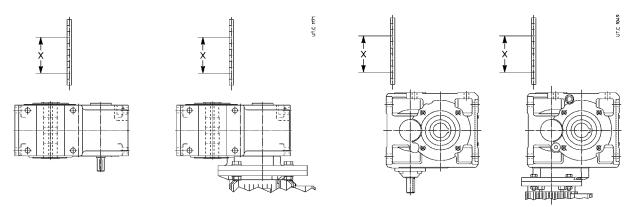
Position the helical gear reducer of gearmotor, mounting position V6 for oil level (quantity) measurement.
